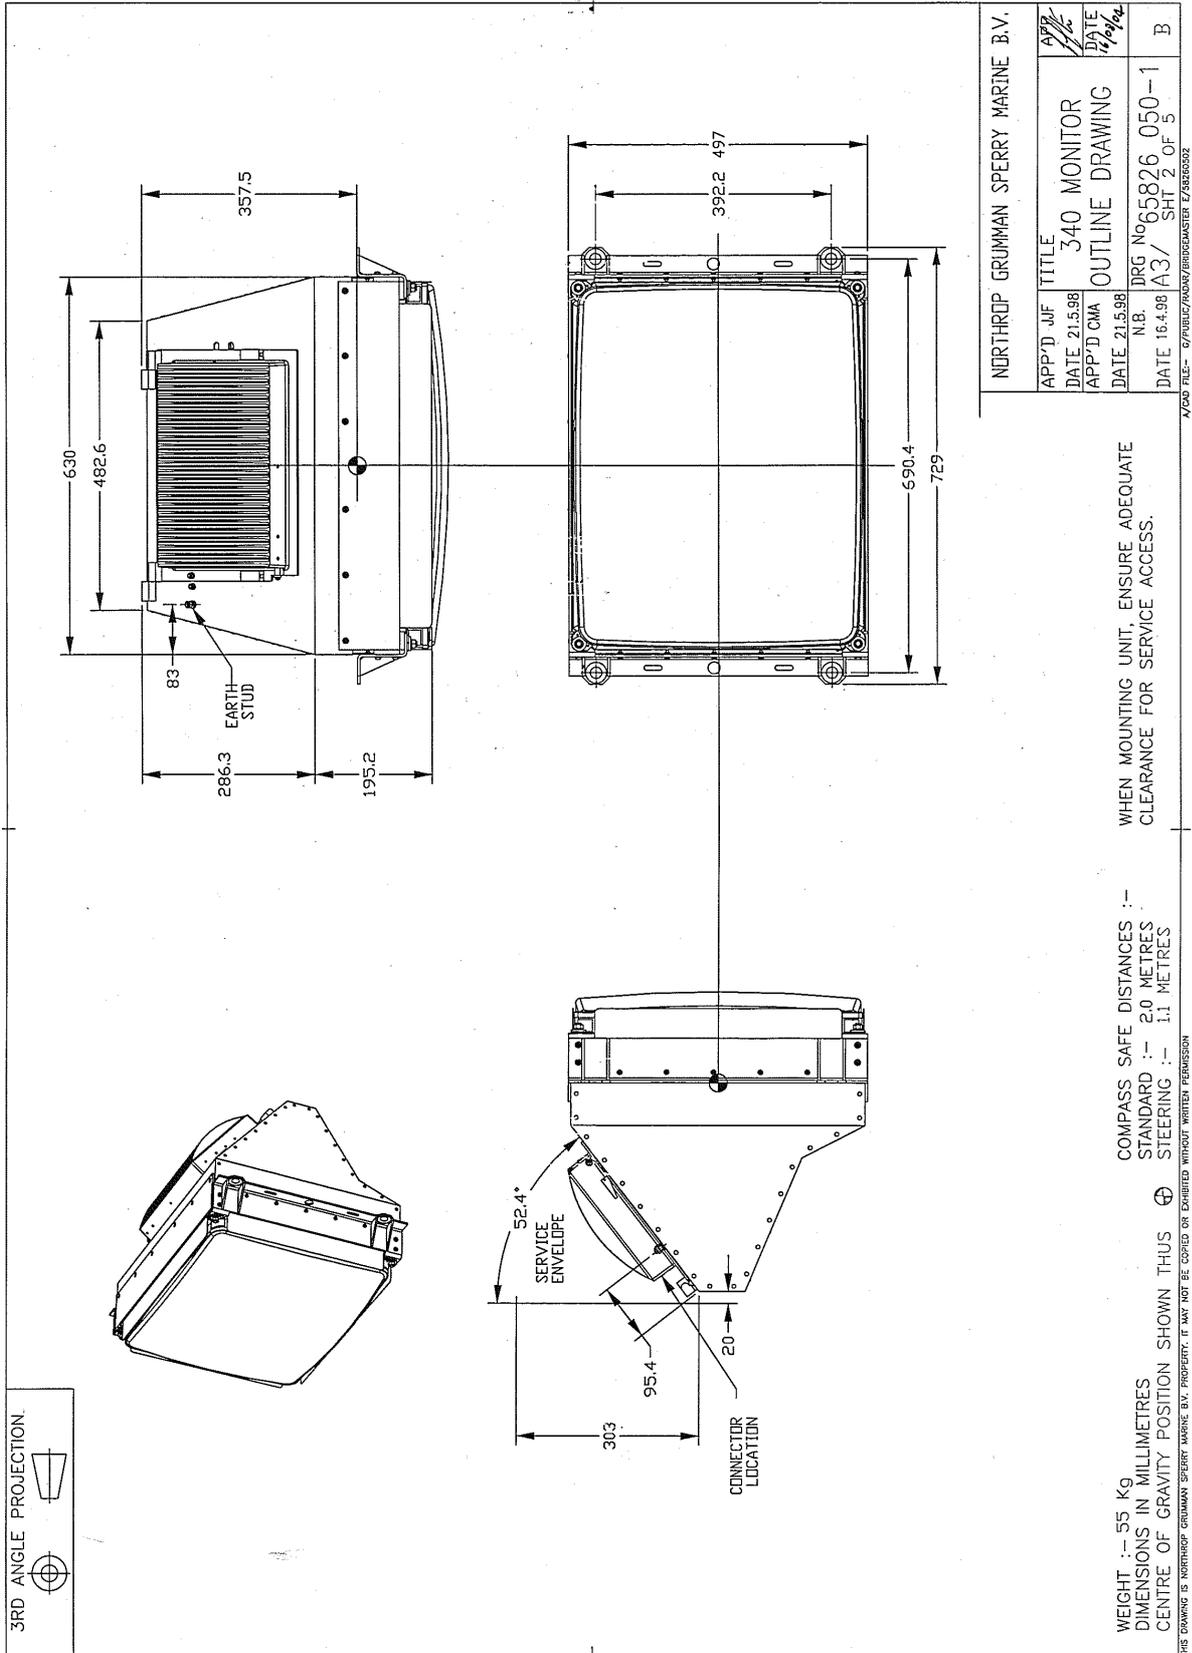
340 Monitor Module (CRT) Outline Drawing (Sheet 2 of 5)
